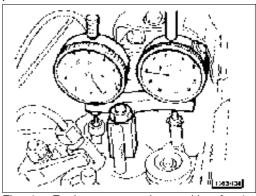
Equipment mounting position for 1st cylinder timing.
